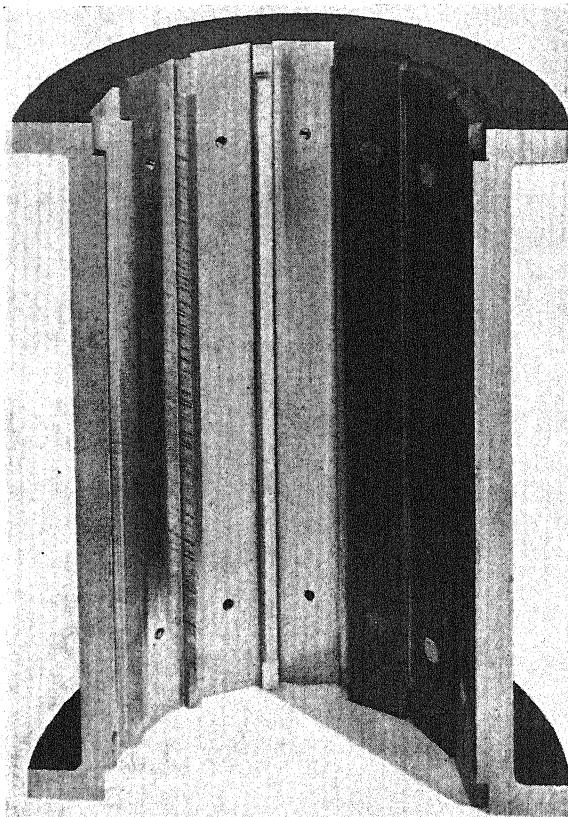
Modified Design of Bearing for the Top Edging-Roll Shaft of a Wheel Rolling Mill
